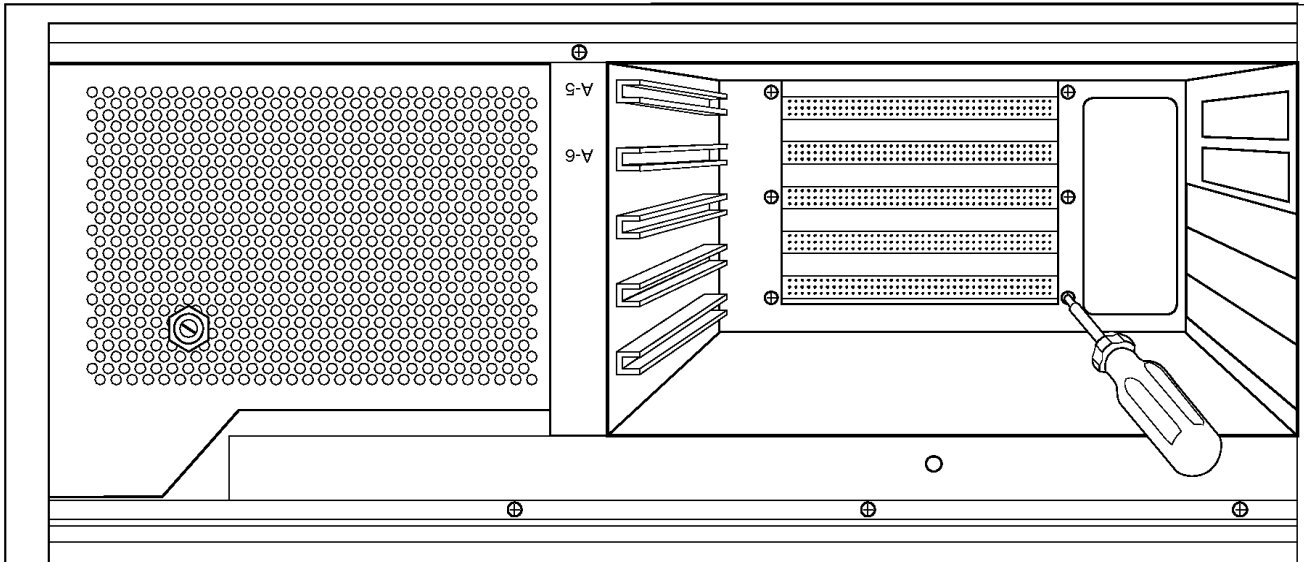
Removing the main interconnect board assembly retaining screws from inside the left card cage
